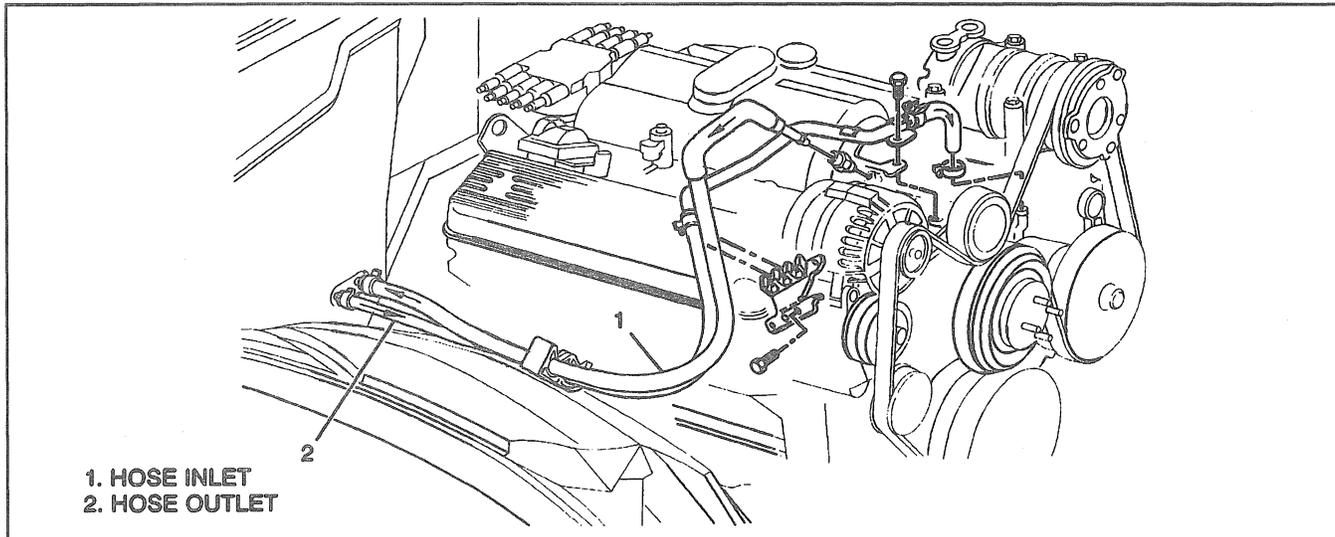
Heater Hose Routing - (All Gasoline Engines)
